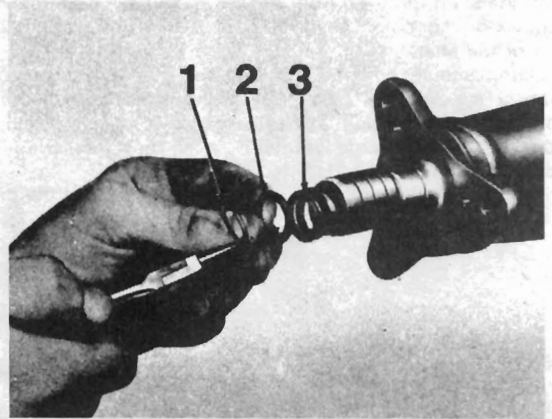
Removing circlip (1), washer (2) and spring (3) from front end of shaft (Sec 3)
